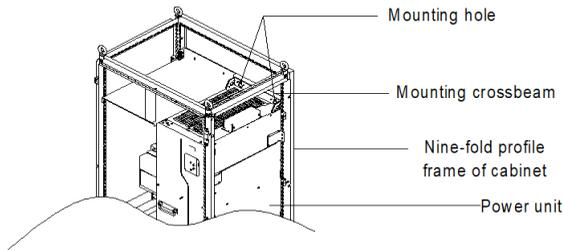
Three-dimension view of mounting a 280–630kW VFD in a cabinet
